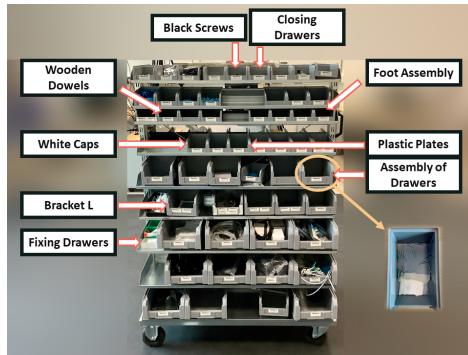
Layout of the supermarket showing the locations of components required for the different assembly tasks.
